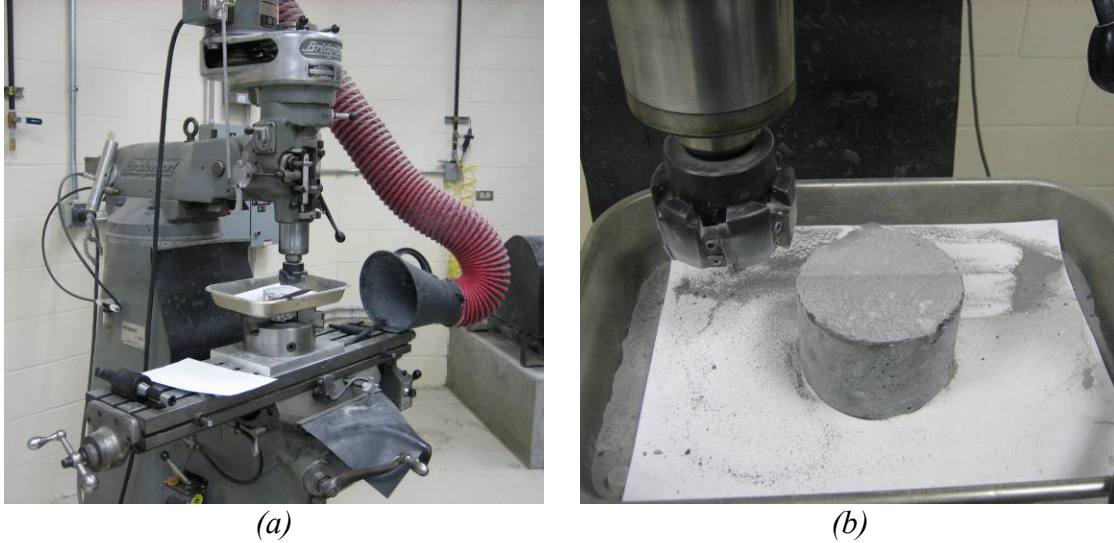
Profile Grinding Using a Milling Machine. a) Milling Machine Set Up, b) Milling Process.
